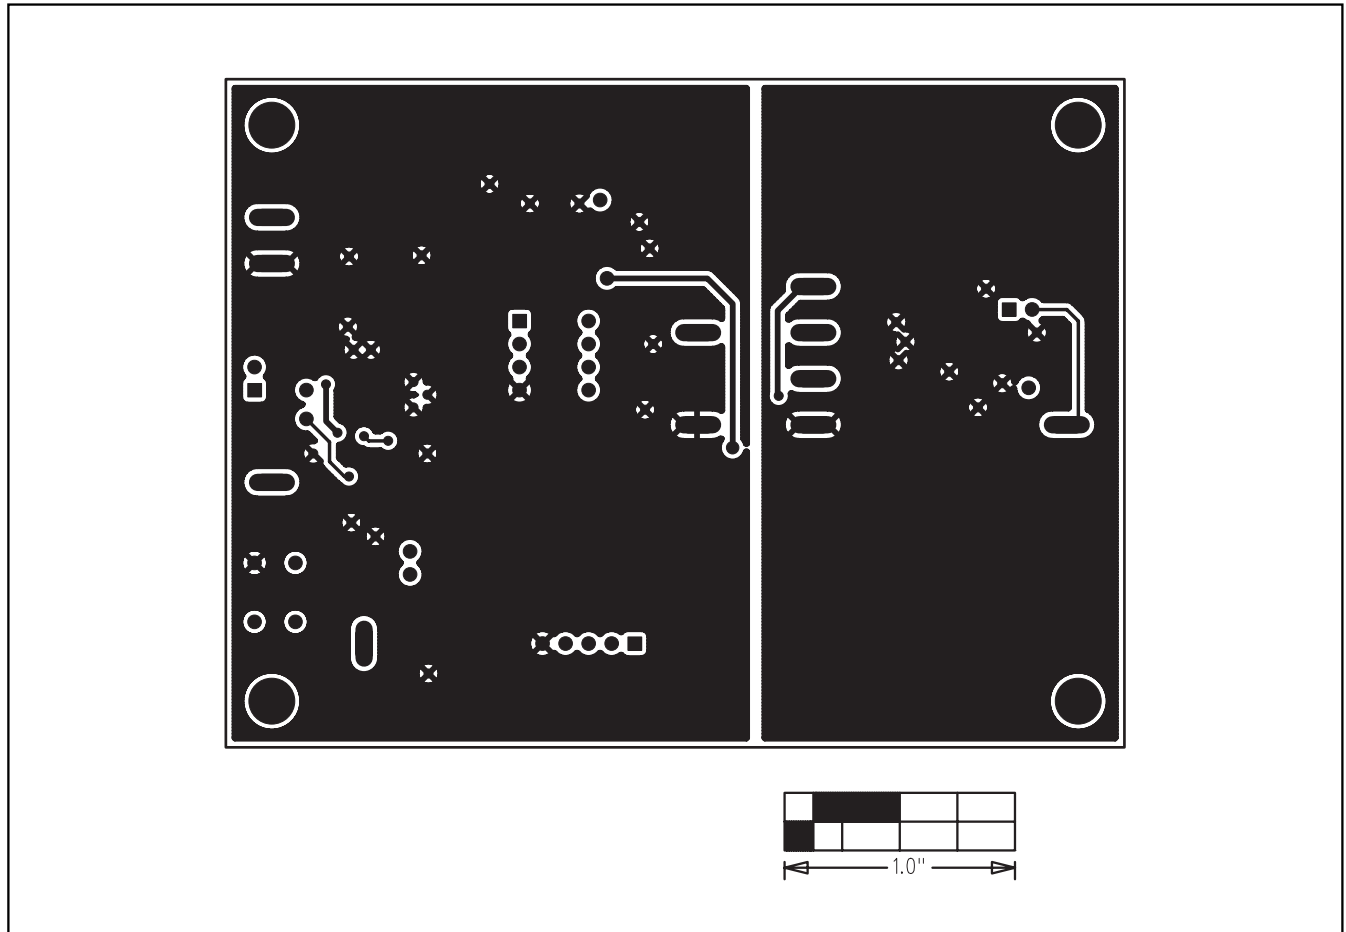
MAX1512 EV Kit PCB Layout—Solder Side
